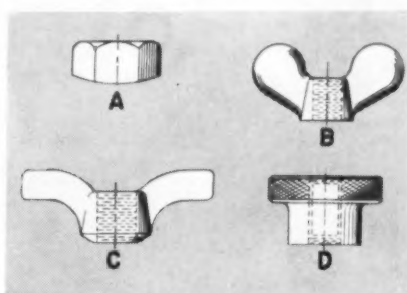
(A) Drawing of hex nut, the bottom of which is spherically ground to fit into an angular or spherical seat; (B) drawing of thumb nut used mostly for small swinging bolts; (C) drawing of thumb nut of heavier design, having spherical end for clamping into socket; and (D) drawing of knurled knob used on medium duty fixtures and drill jigs.
